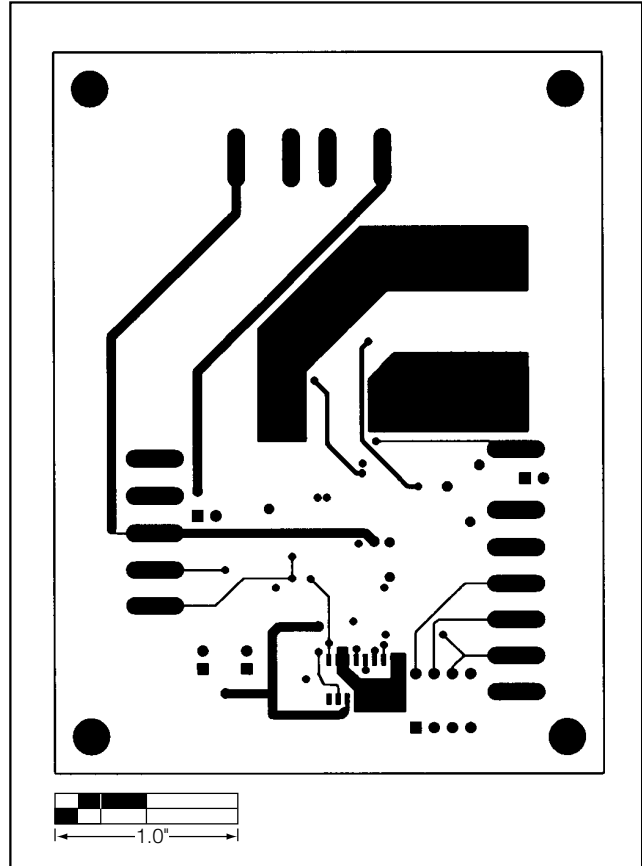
MAX1636 EV Kit PC Board Layout—Solder Side
